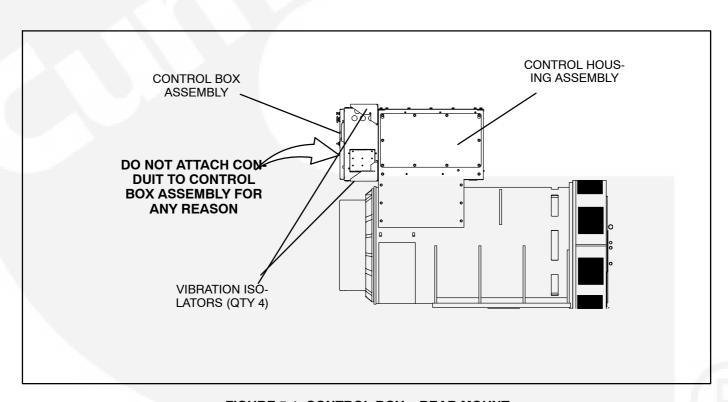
CONTROL BOX - REAR MOUNT
